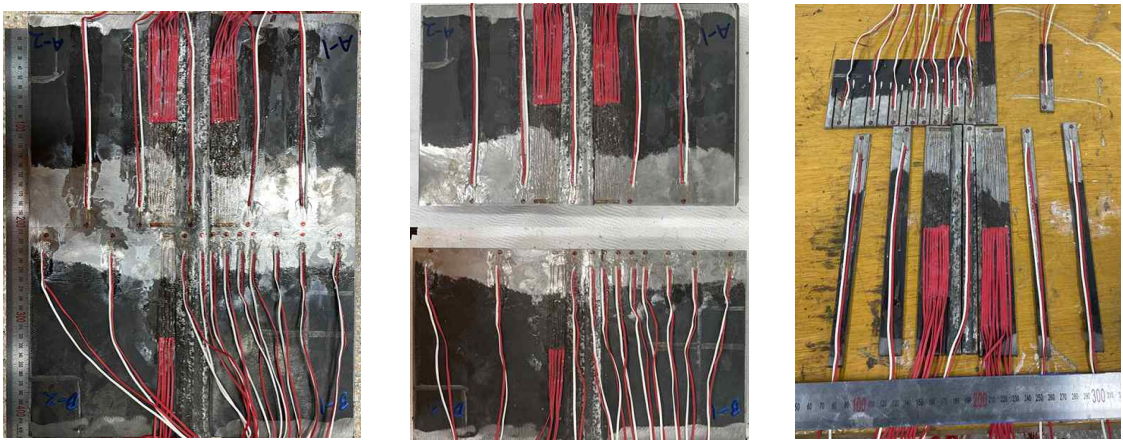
Strain gauges attachment position of constrained weld
